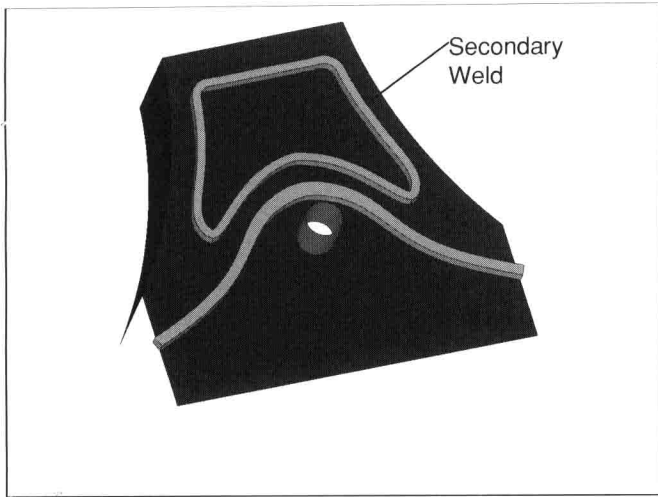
Modified Weld (Presence of Secondary Weld)
